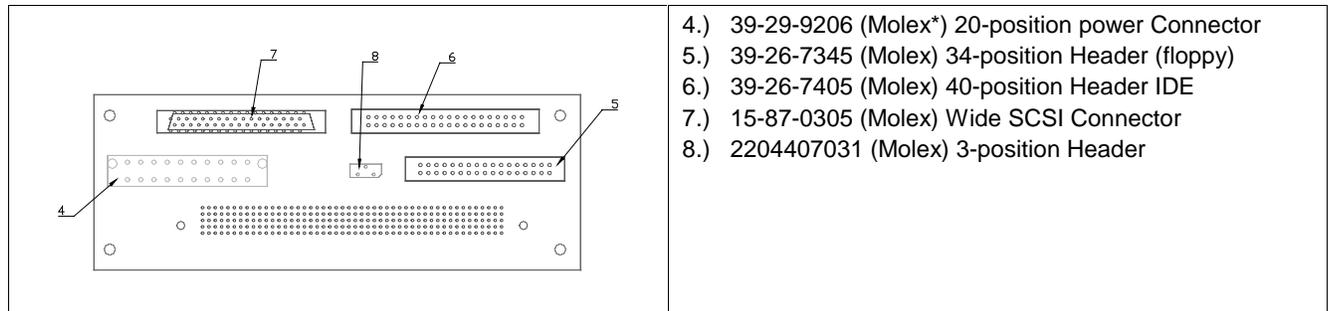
Peripheral Bay Board (Chassis Side) Layout
